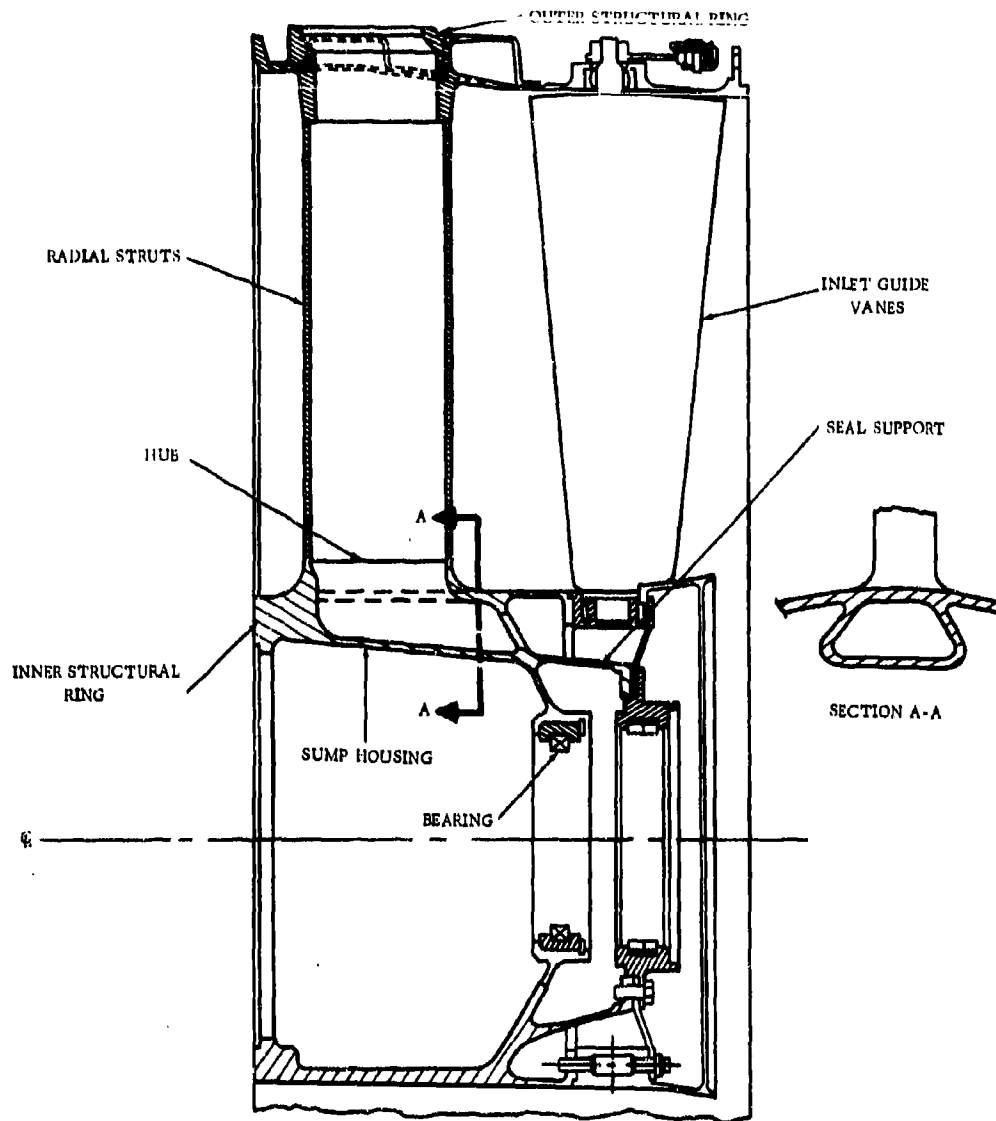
J79 COMPRESSOR FRONT FRAME
